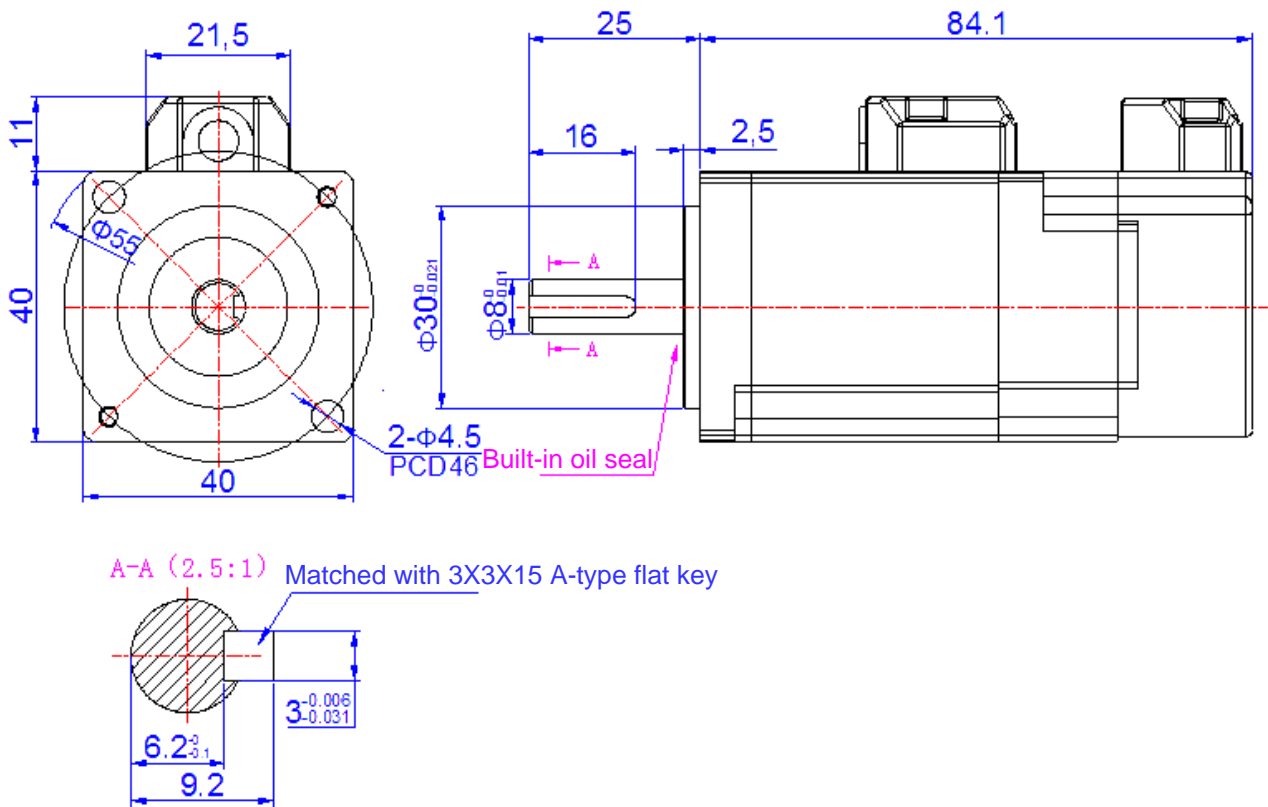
Outline dimensional drawing of ME040 series (without brake)
